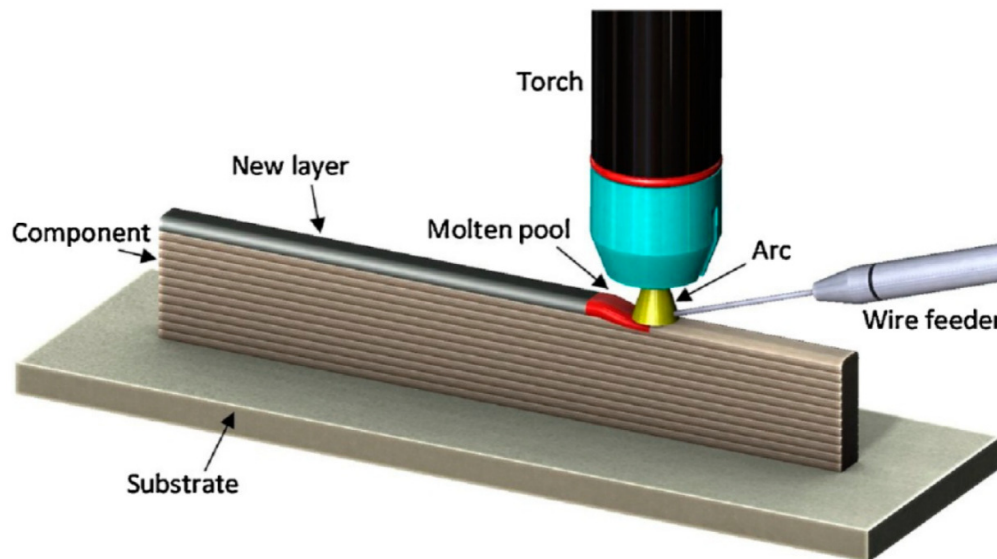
Demonstrates the procedure of the wire arc welding process and their component.
